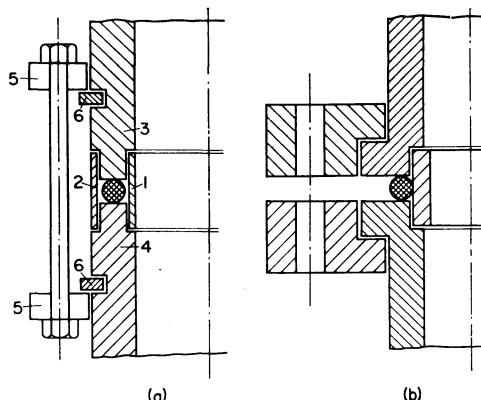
O-ring seals with spacers: (a) with concentric tubular spacers (after Stiff¹¹⁹⁰); (b) with single spacer (after Edwards³²⁹)
